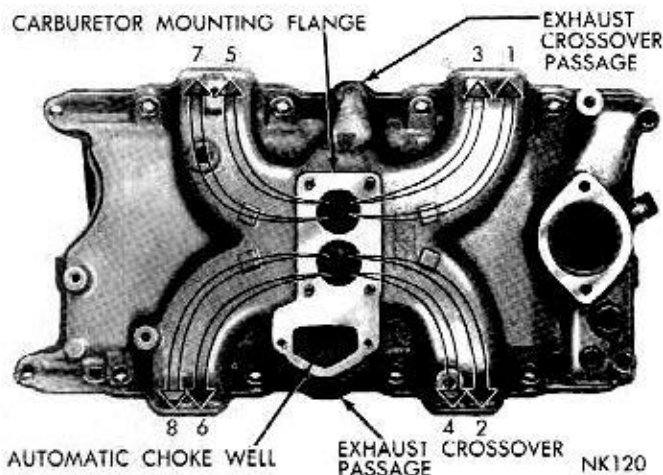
Intake Manifold—318 Cubic Inch Engine
